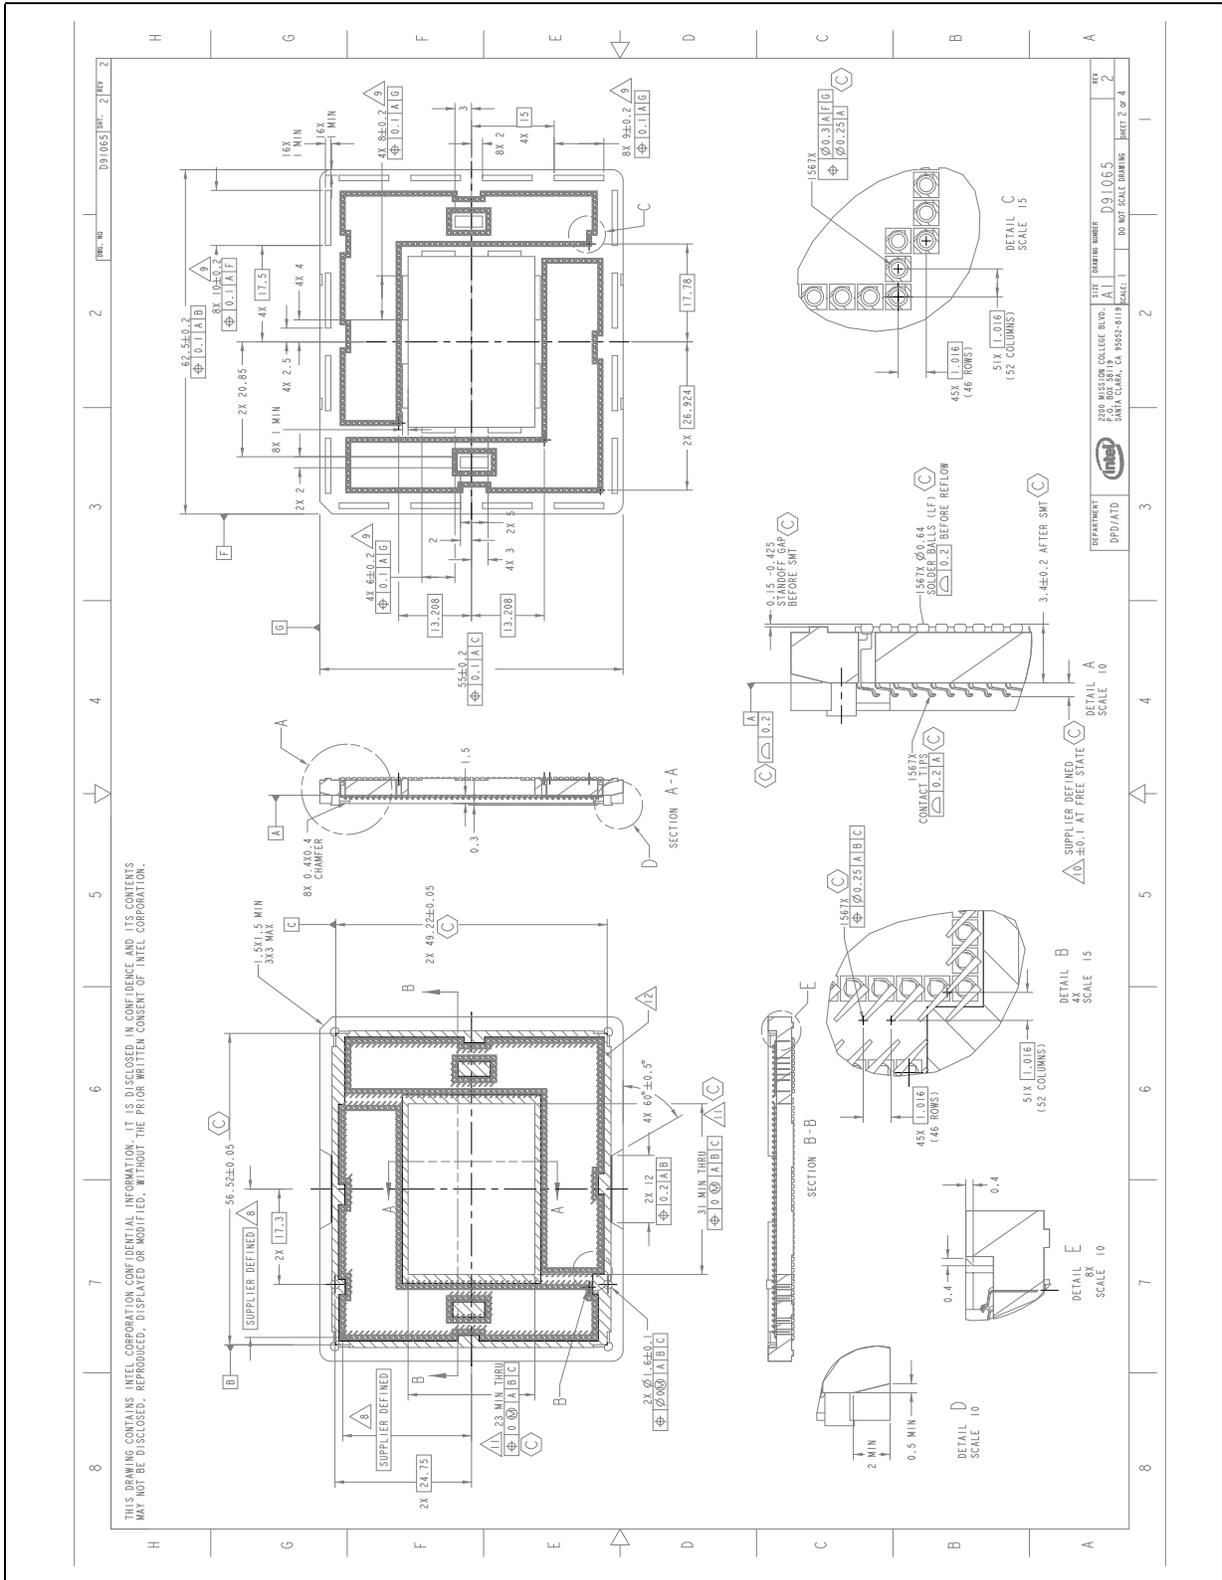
LGA 1567 Socket Mechanical Drawing – Sheet 3 of 4
